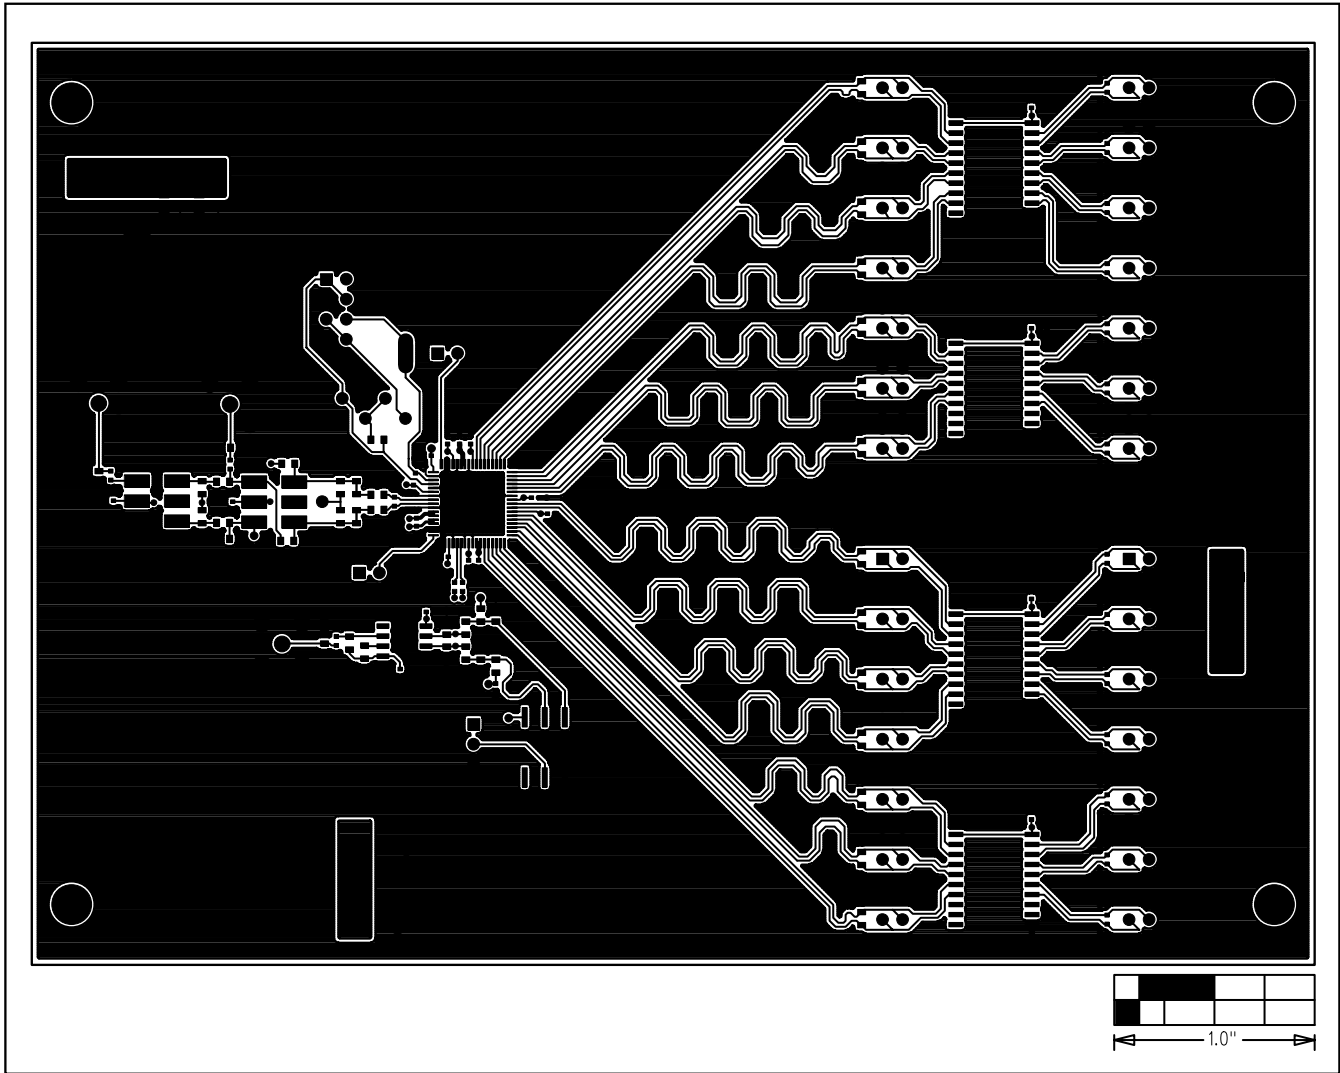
MAX1213/MAX1214/MAX1215 EV Kit PC Board Layout—Component Side
